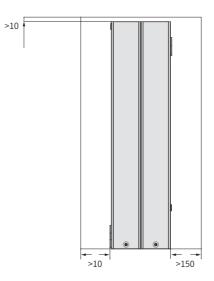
Backplate mounting of two cabinets side by side (unit: mm)
